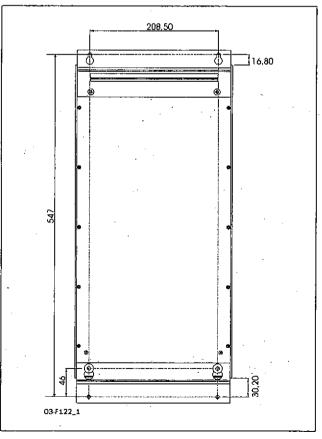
Hole pattern for MSF-170 to MSF-250 with upper mounting bracket instead of DIN-rail.
